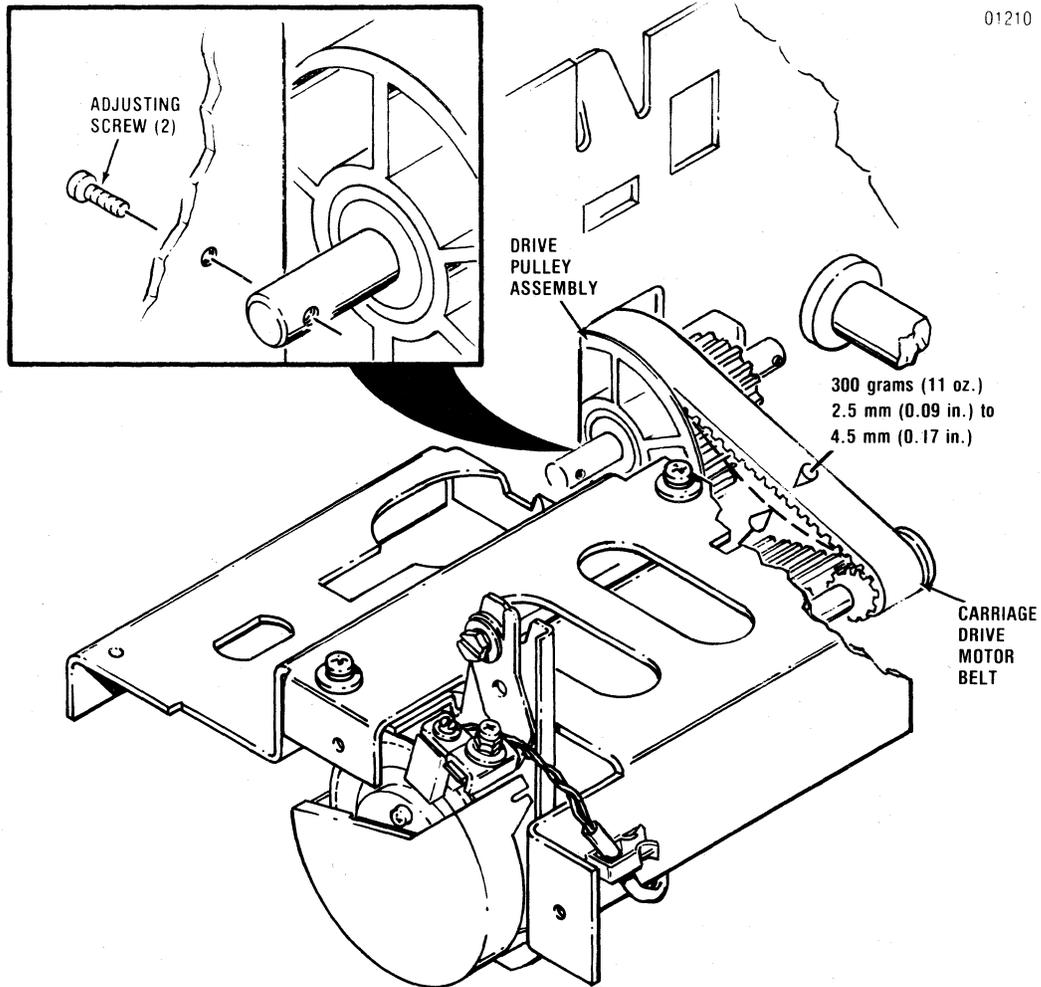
CARRIAGE DRIVE MOTOR BELT ADJUSTMENT
